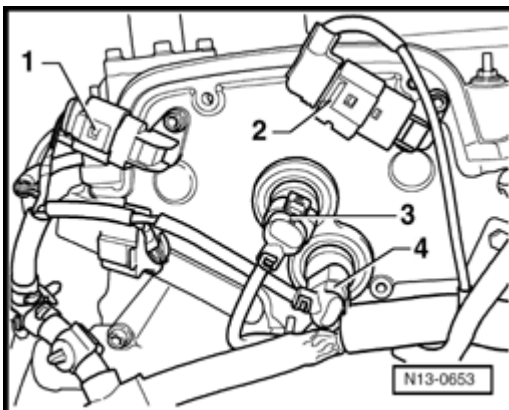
Identifying CMP Sensor G40, CMP Sensor 2 G163 And Connectors
